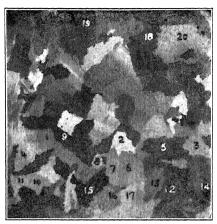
Horizontal section through 21/8-INCH DEEP CASTING NO. 2, 2 INCHES ABOVE BOTTOM SURFACE.
